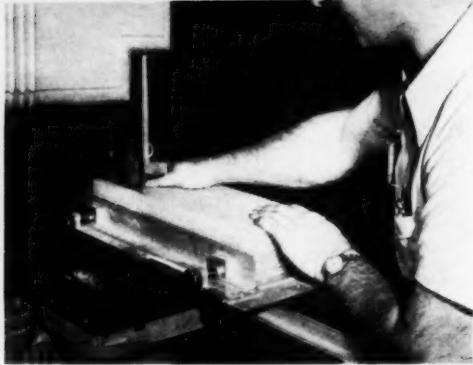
Method of slicing honeycomb on special carriage. Thumbscrews make it possible to cut the material to accurate thickness
